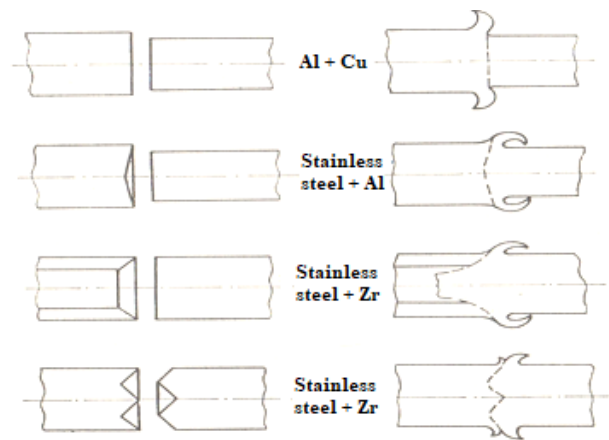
Some adjustments of welding workpieces to ensure uniform plastic deformation
